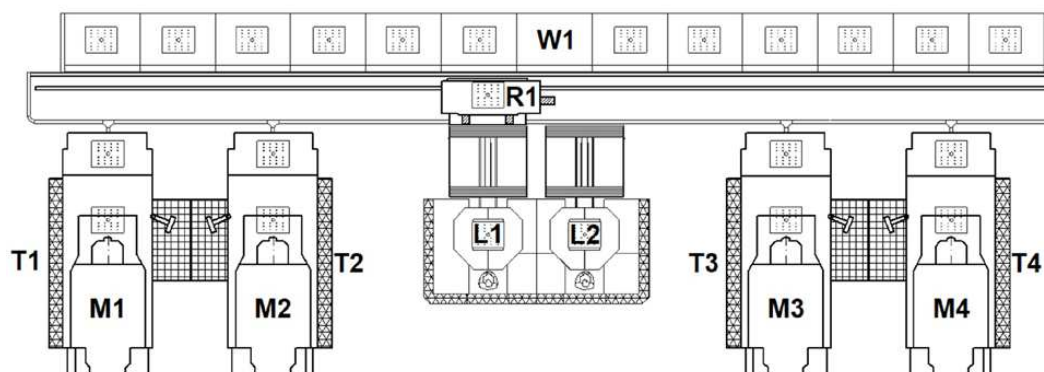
A scheme of the analyzed FMS; M1 – machine 1, M2 – machine 2, M3 - machine 3, M4 – machine 4, R1 - robot, L1-L2 – loading & unloading stations 1&2, W1 - pallet warehouse, T1-T4 – tool magazines 1-4
